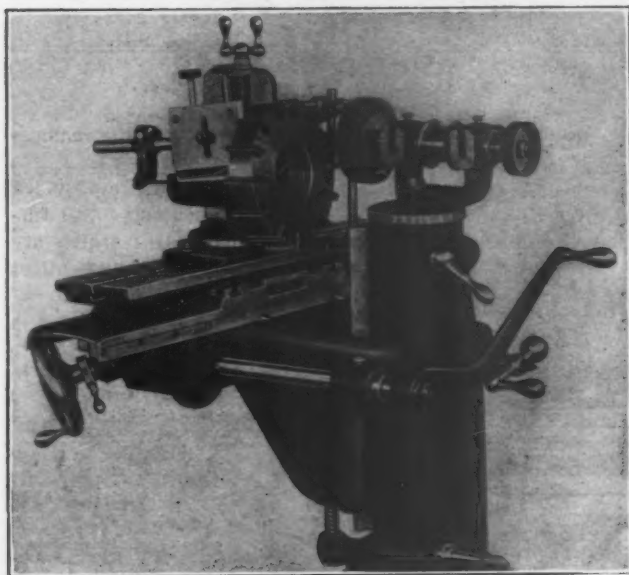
Grinding the Face of an Inserted Tooth Milling Cutter.
